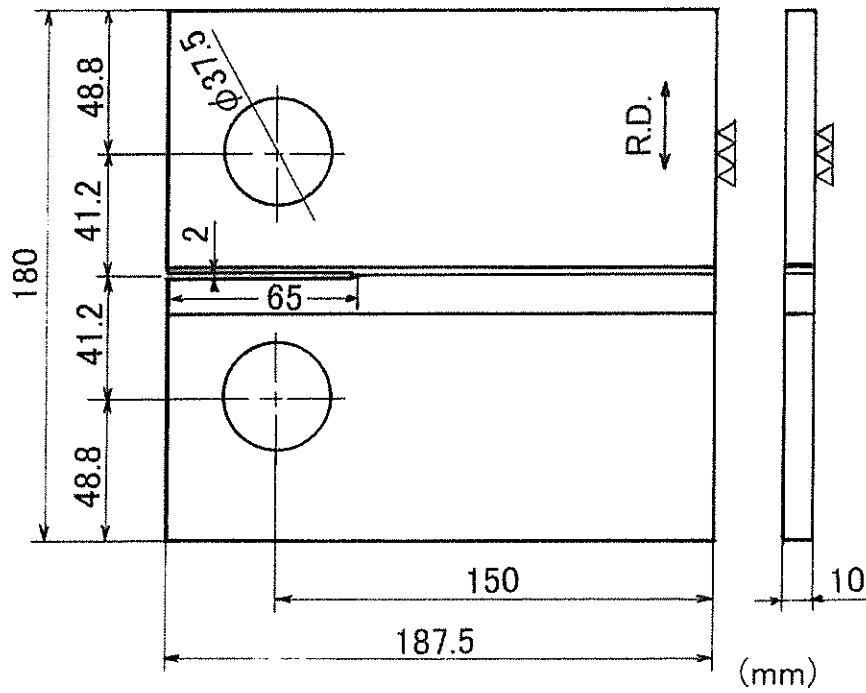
Shape and size of CT type specimen for fatigue crack propagation test
